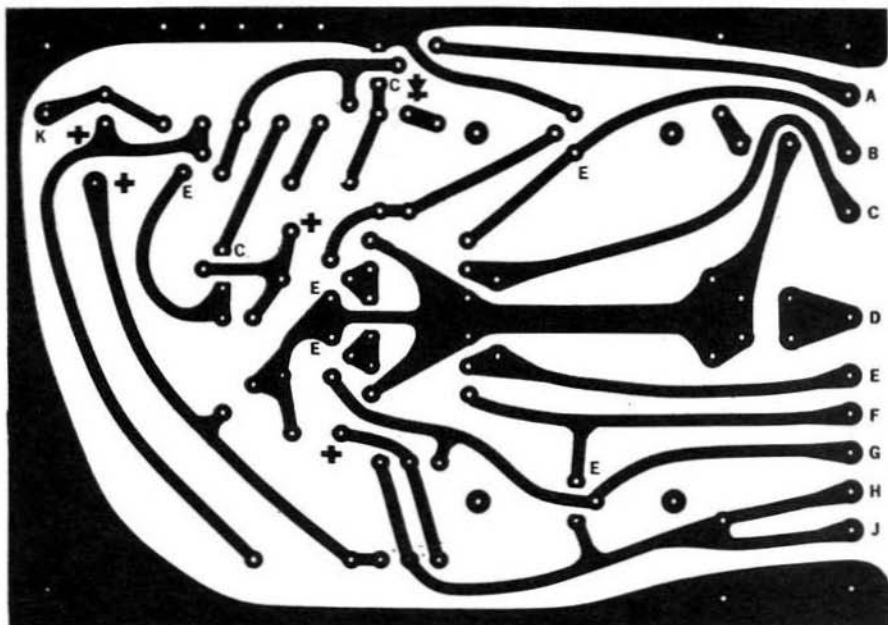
Foil pattern for the Super Tiger. Like the Tiger PC board, this one is also available etched and drilled (see Parts List for Fig. 5).
